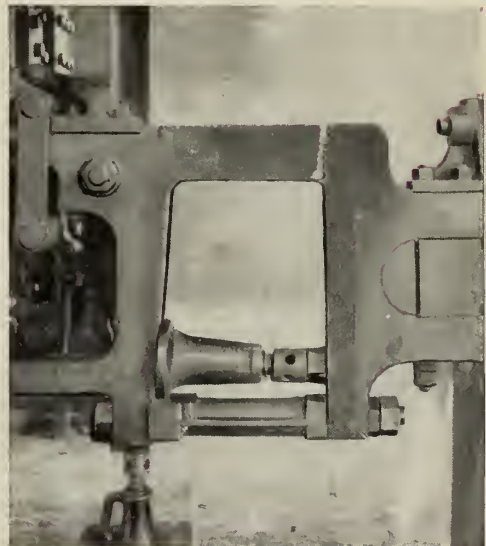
Fracture on Locomotive Frame, Opened Up by Drilling and Held in Place by Jacks, in Preparation for Thermit Welding.
